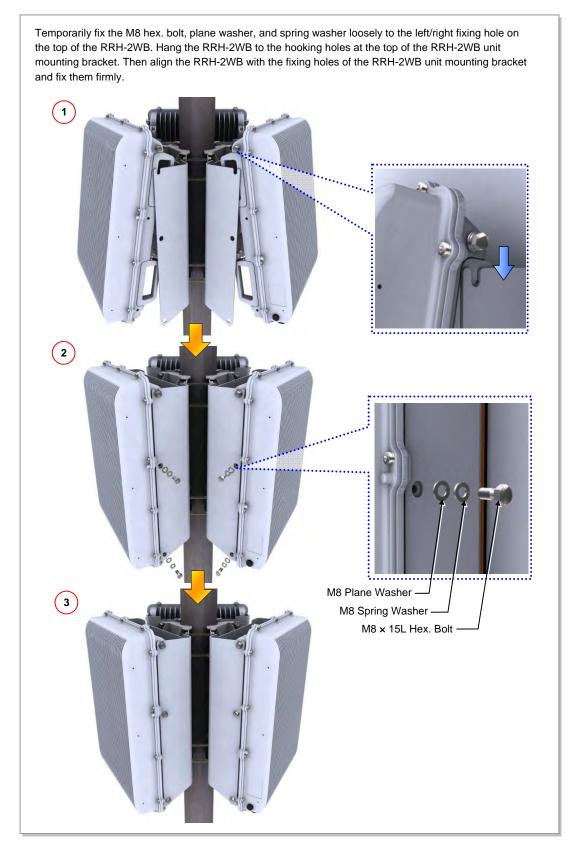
Fixing 3 Sector Pole Type RRH-2WB (5)
